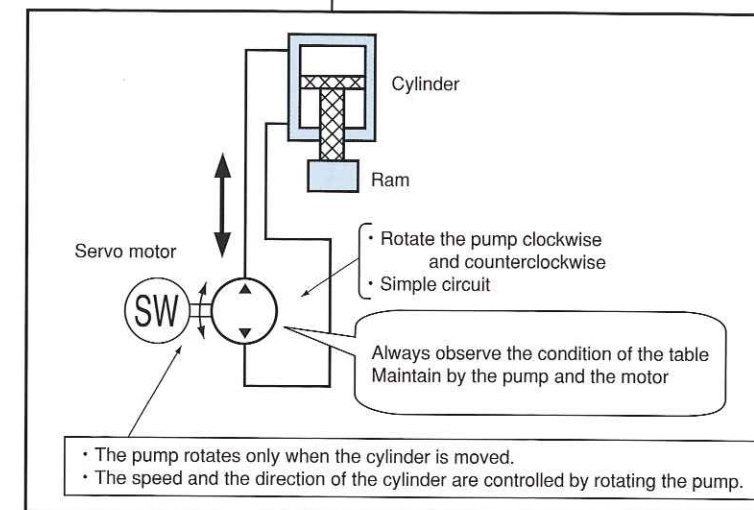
Basic structure of Hydraulic pump direct drive with servo motor system
